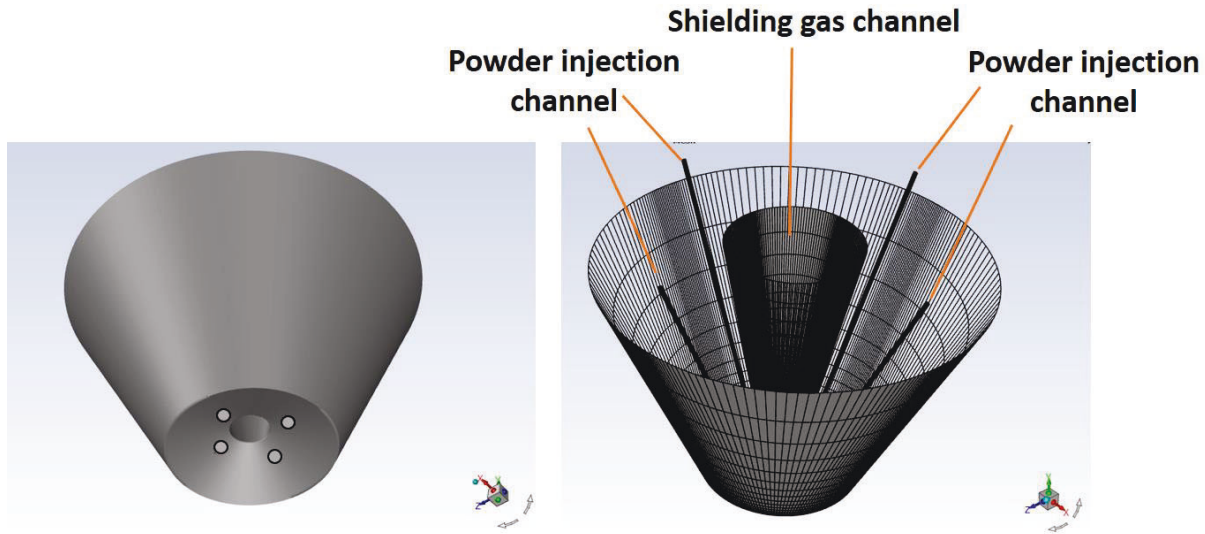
3D model of nozzle. Left: Bottom view, Right: Top view
